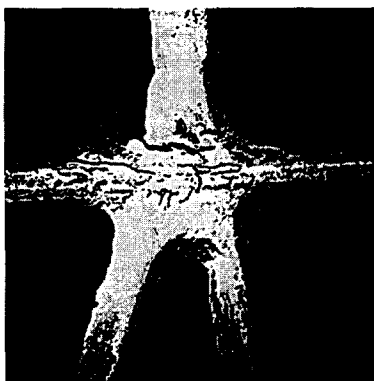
Grid node of a corroded battery; concast Pb-1.8Sb grid (drum side) showing hot-cracking and cold-welding.
